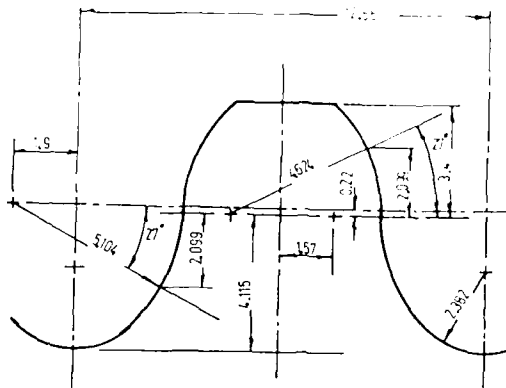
Dimensions of double circular-arc tooth-profile test gear tooth in normal plane.
